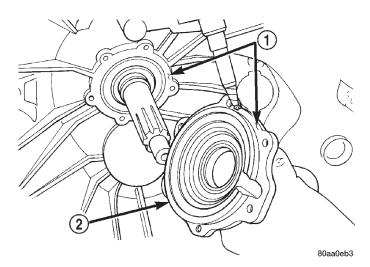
Applying Sealer To Bearing Retainer And Housing—Typical
